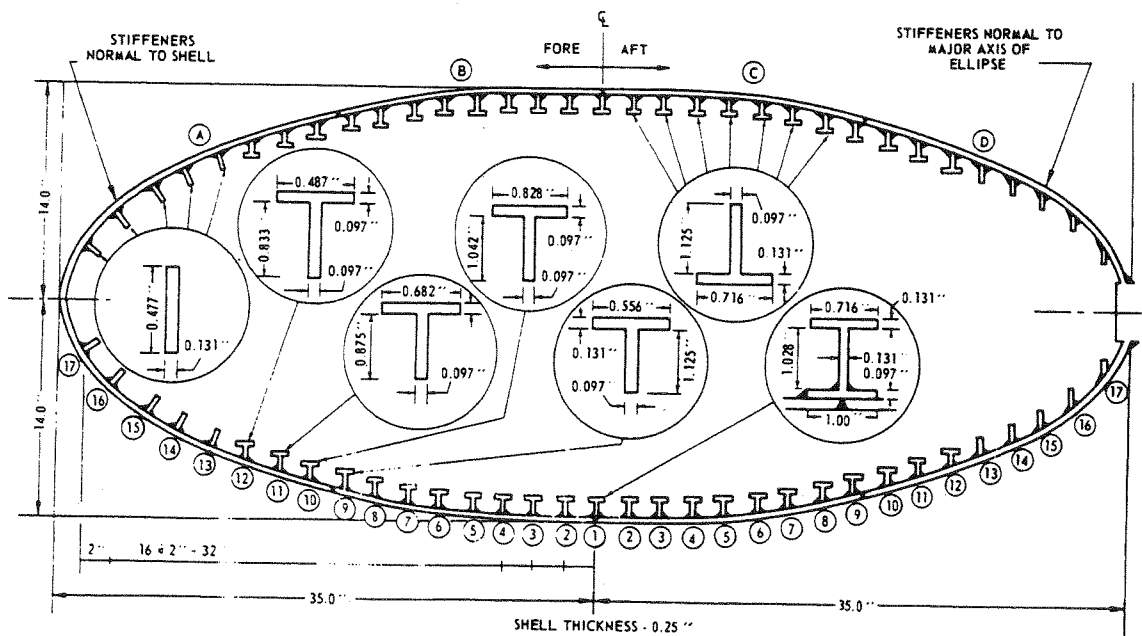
STEEL ELLIPSOIDAL SHELL WITH INTERNAL RING-STIFFENERS WELDED TO IT. THIS STRUCTURE IS SUBMITTED TO EXTERNAL PRESSURE (FROM BUSHNELL [22]).
